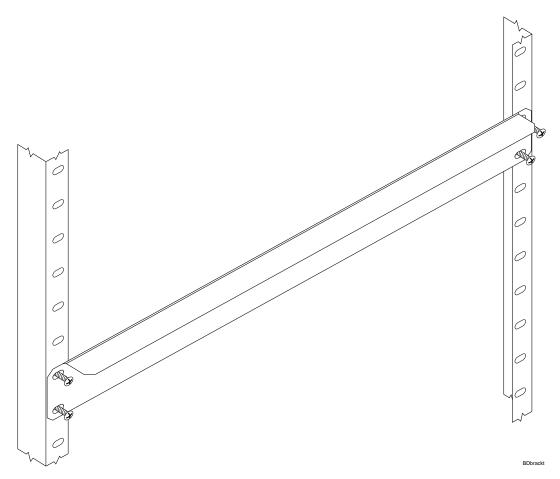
Helper bracket for mounting a BlackDiamond 6800 series chassis
